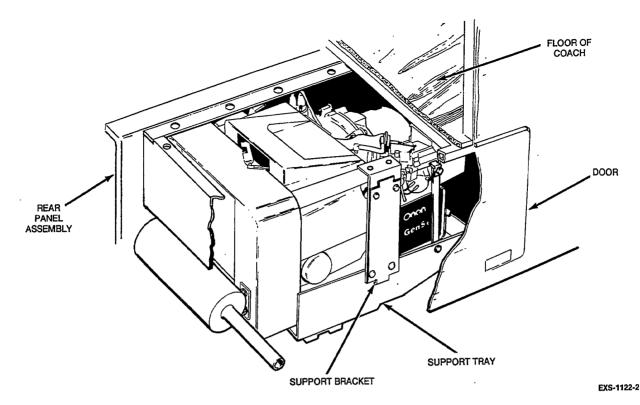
TYPICAL UNDER-FLOOR INSTALLATION
